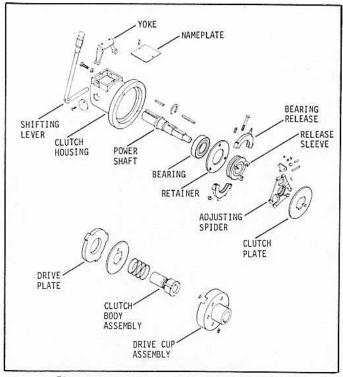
DRY TYPE CLUTCH - DISASSEMBLED
